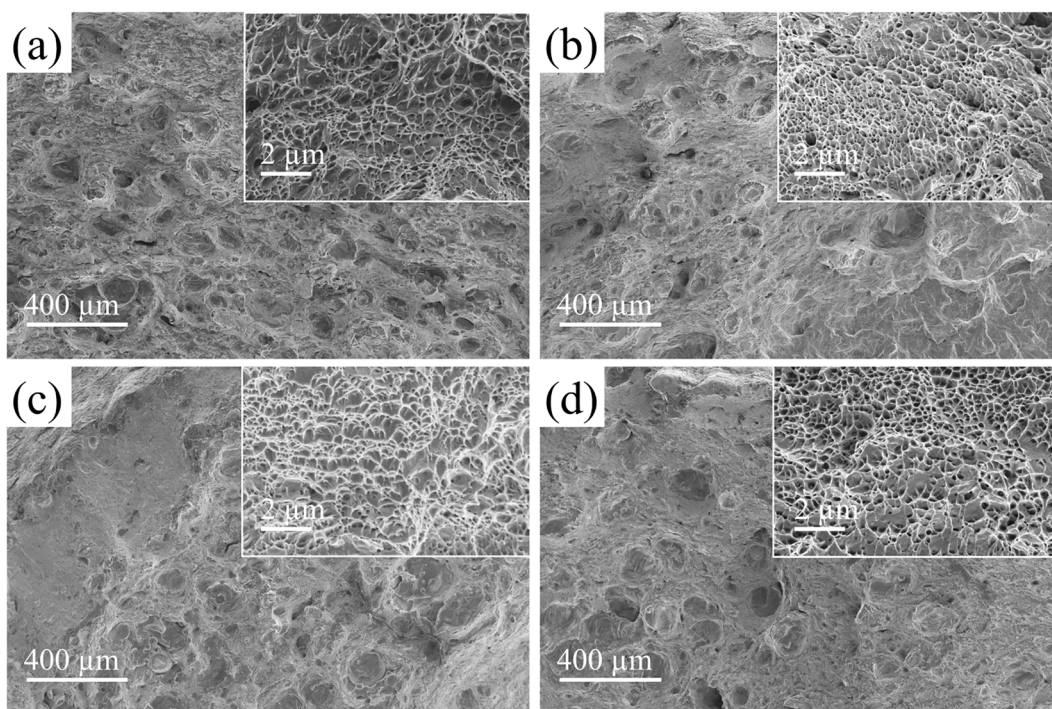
Comparison of high-cycle fatigue fracture dimples: (a) fatigue specimen A-06 (b) fatigue specimen B-06; (c) fatigue specimen A-05; (d) fatigue specimen B-05.
